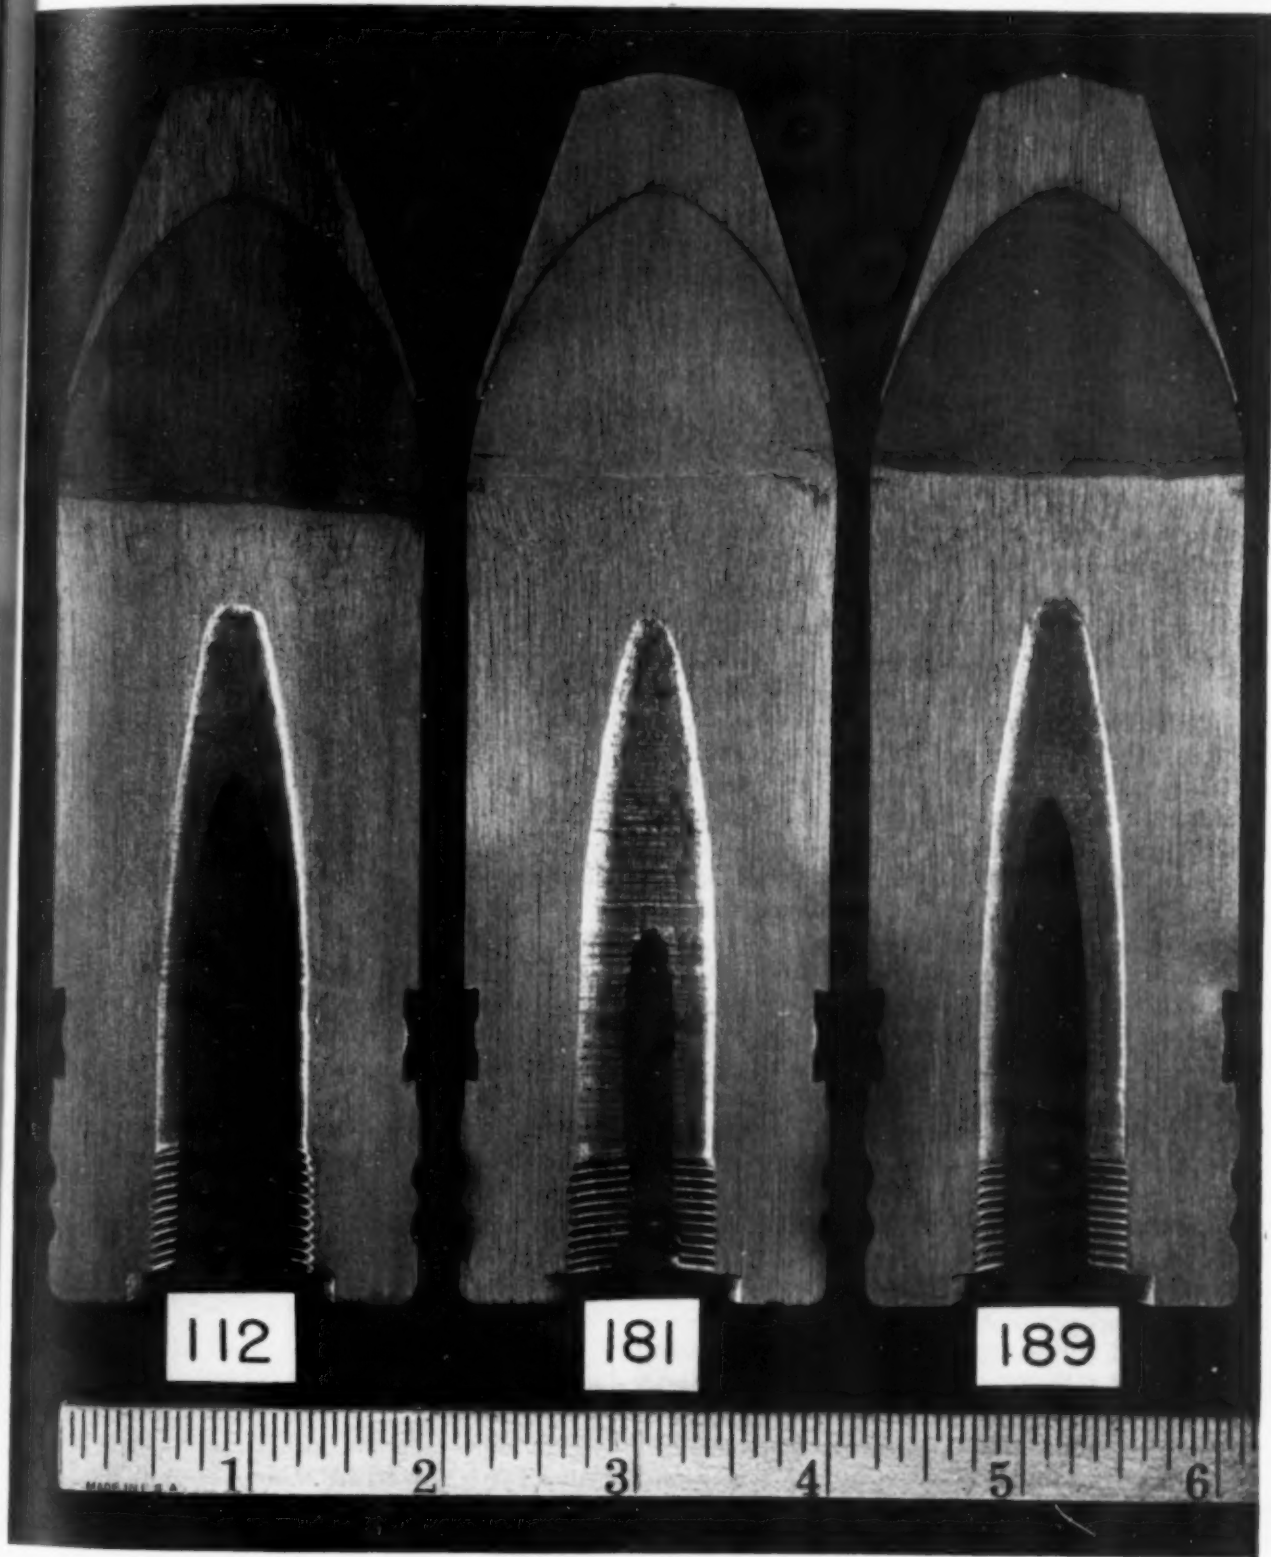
Macro-Etched Sections of Duplex Welded A.P. Projectiles, 50-Mm. Caliber, Show Perfect Welds But Many Quench Cracks in Hard Nose
